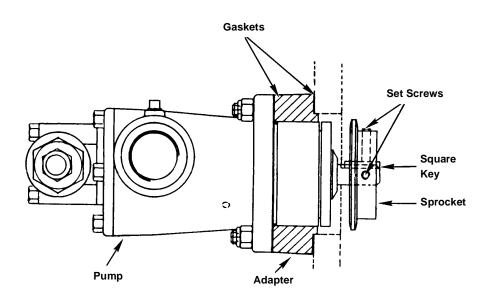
LUBE OIL PUMP CHAIN SPROCKET - TYPICAL
